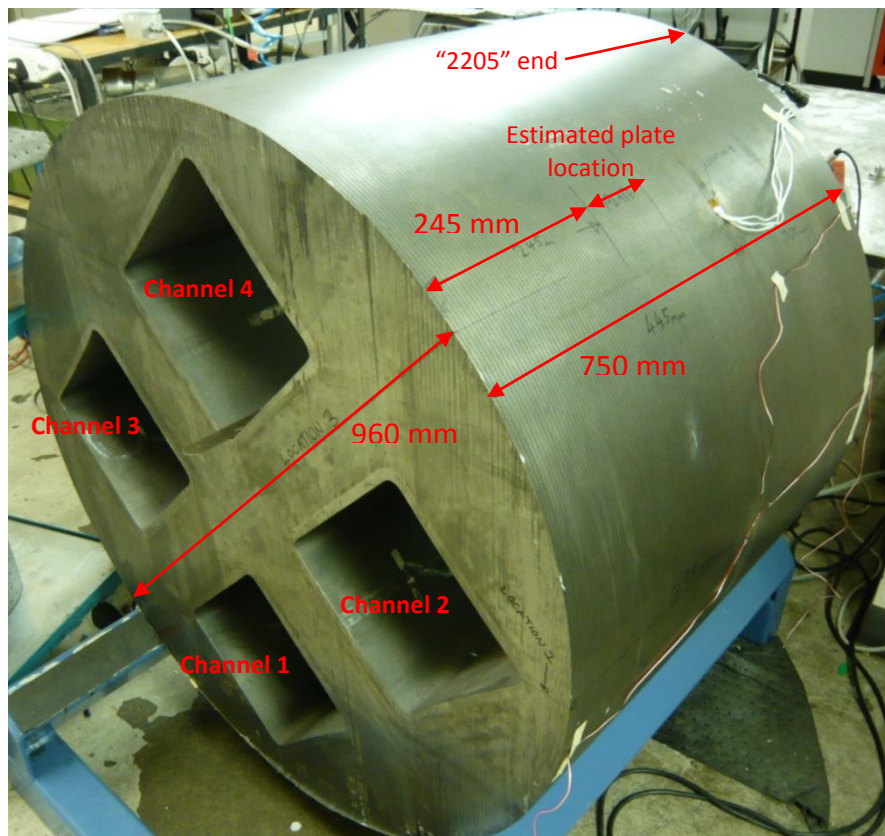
Photograph of the Cast Iron Insert section supplied for measurement with ICHD strain gauges attached by VEQTER.
